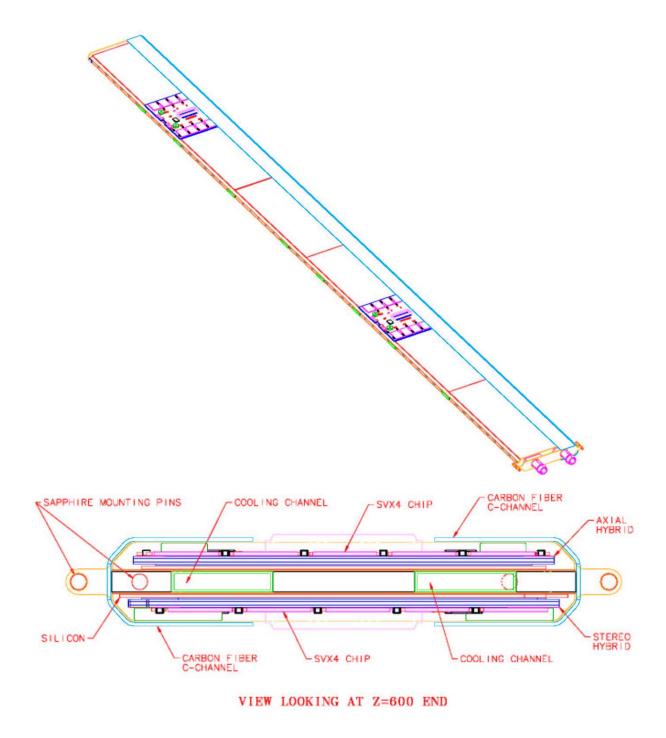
Stave assembly drawings. The upper drawing shows a isometric view of the stave with one of the C-channels removed. The lower plot is an end view of a complete stave assembly.
